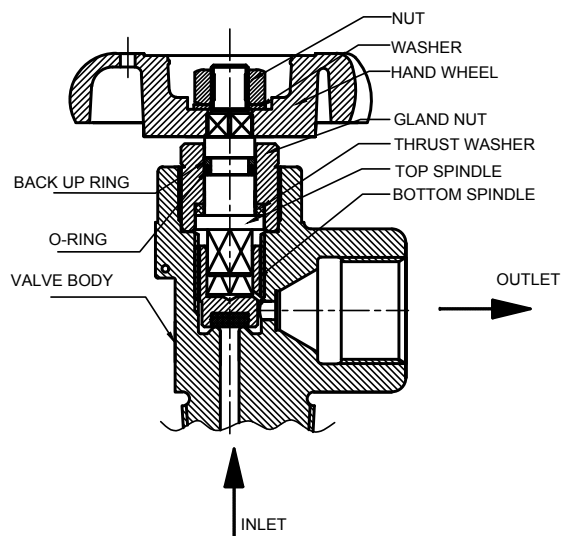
ILLUSTRATION OF O-RING GLAND SEAL VALVE, NON-METALLIC SEAL (WHEEL OPERATED)
